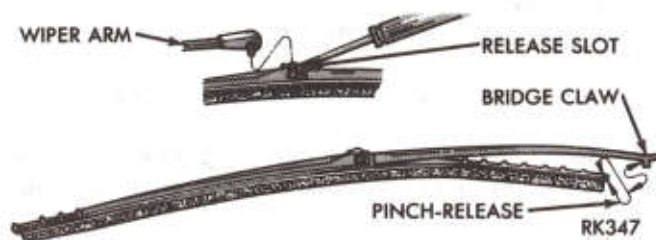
Removing Blade and Wiping Element from Blade Assembly Type "A"
